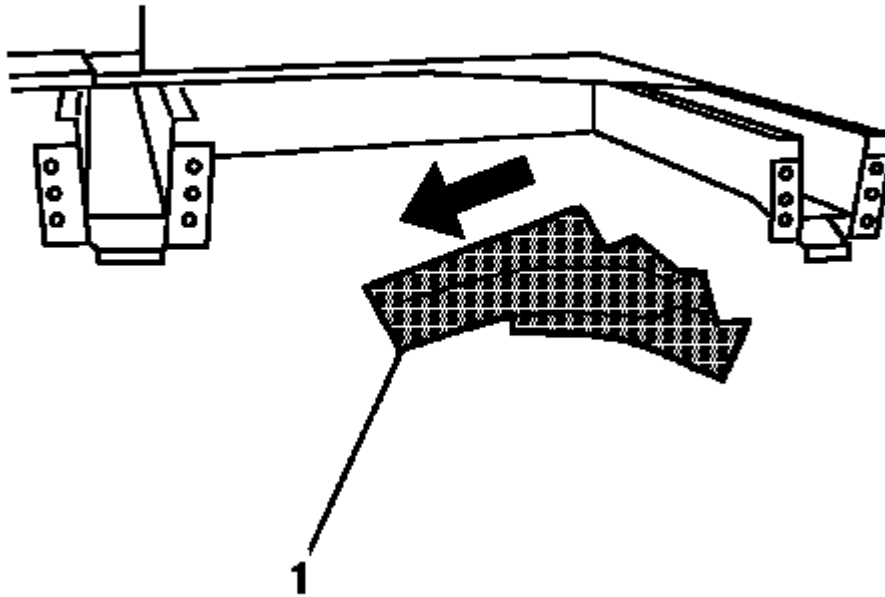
Locating And Drilling Out All Necessary Factory Welds To Remove Five Bar - Rear Side Underbody Rail (Extended Sedan)
